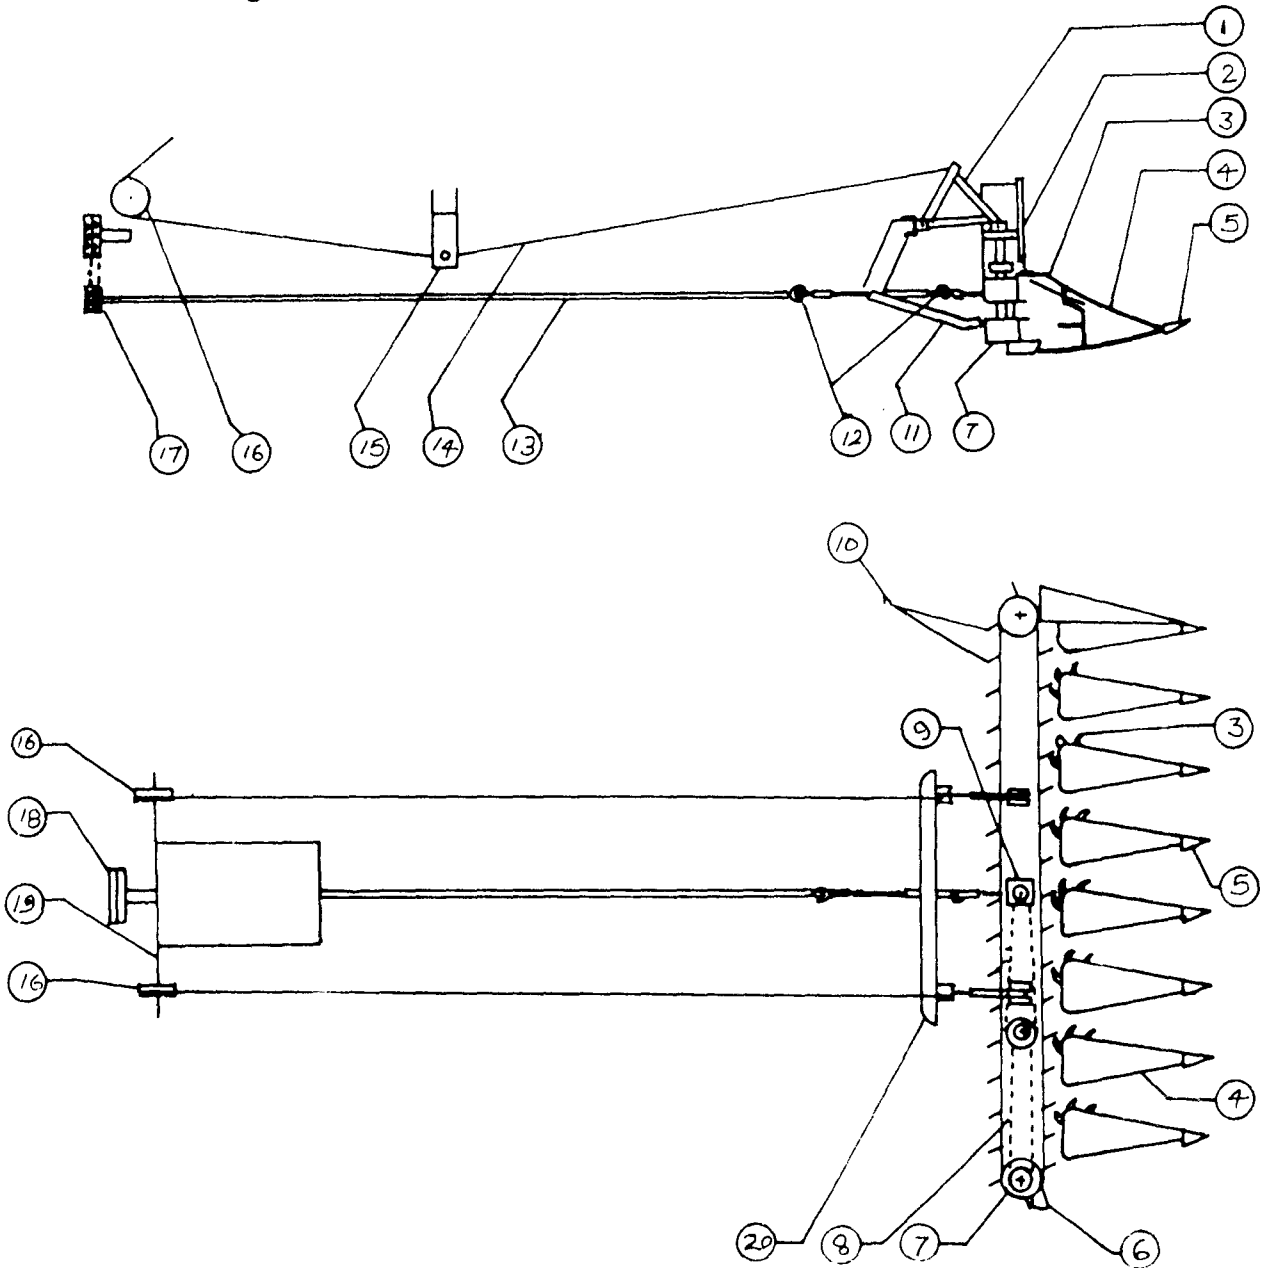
POWER TRANSMISSION SYSTEM IN TRACTOR FRONT MOUNTED REAPER WINDROWER
